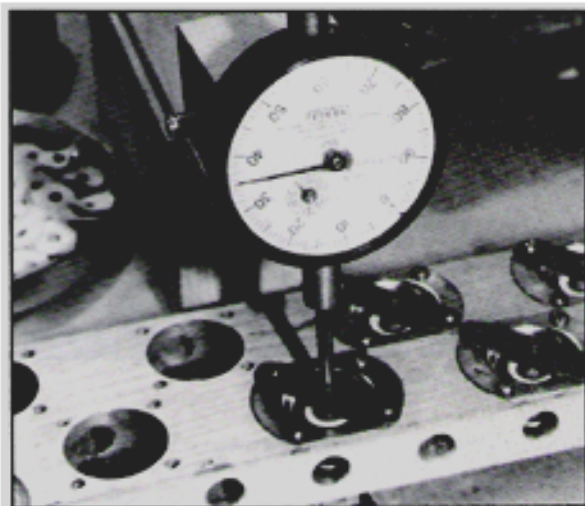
USING A PUSH ROD BUILT INTO THE TABLE, THE VALVE IS PUSHED UP AND A TRAVEL READING IS TAKEN.
